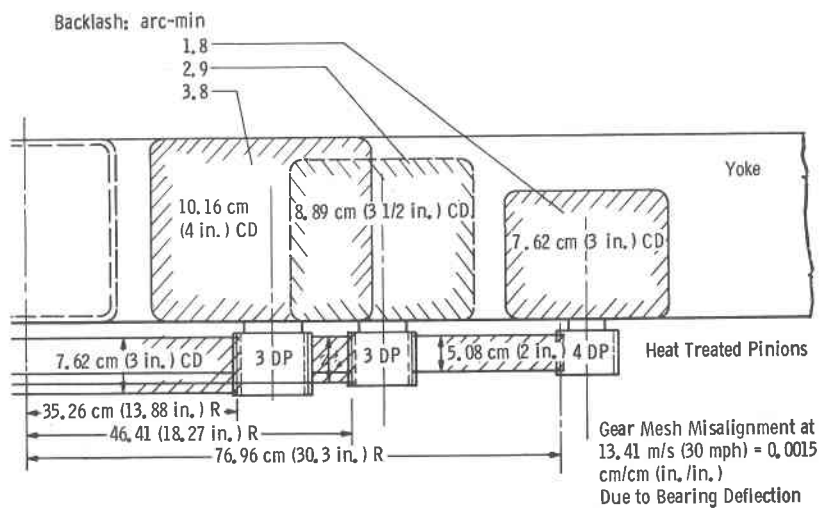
Direct Gear Drive Concepts Using Yoke Mounted Reducers
